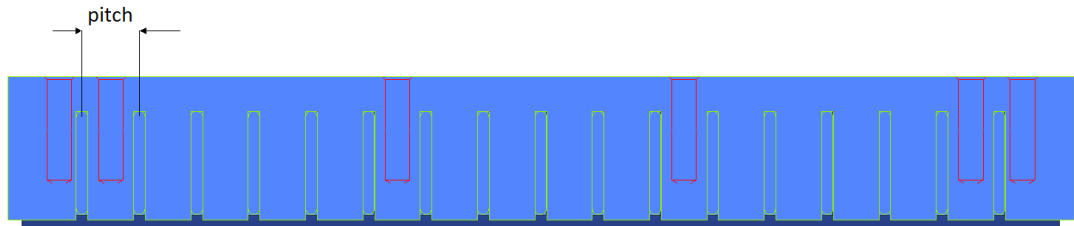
The position of MPE tubes and screw holes inside the baseplate
